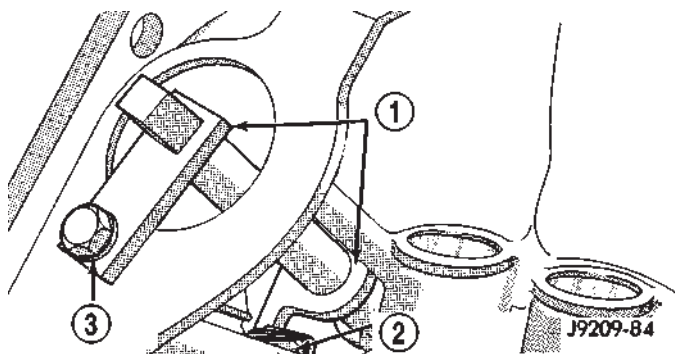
Camshaft Holding Tool C-3509 (Installed Position)
